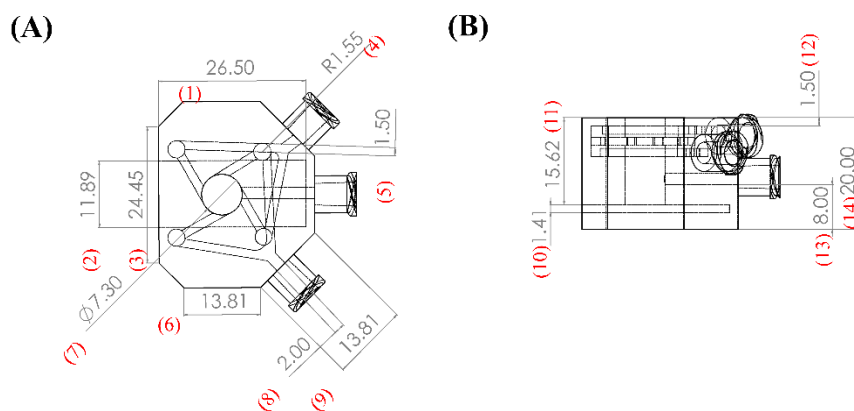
(A) Top view and (B) side view of the array of the sensor integrated microfluidic mixer device with marked dimensions.
